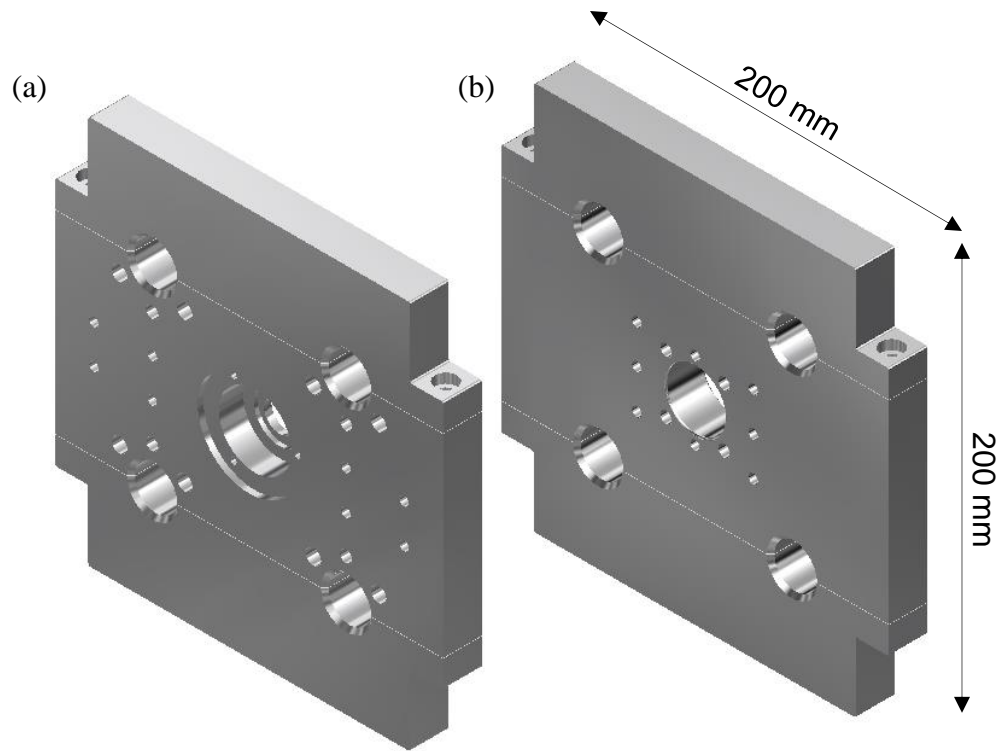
Custom-designed aluminium (a) cage plate and (b) end plate of the portable set-up. Also showing provisions made for incorporating optical components into them.
